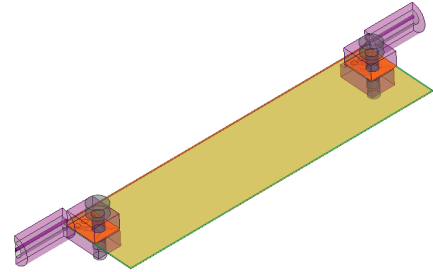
Rosenberger connector dimensions extracted from the datasheet (SMA JACK PCB 32K243-40ML5).
